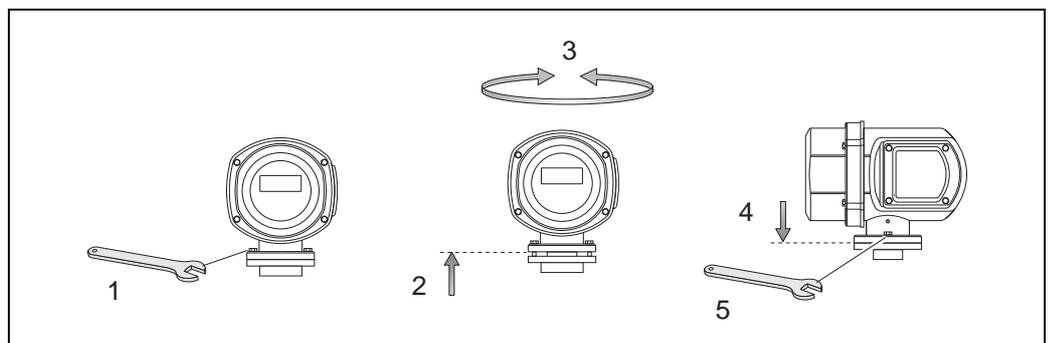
Turning the transmitter housing (stainless-steel field housing)
